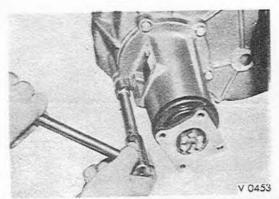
Removing the front drive extension housing from the transfer case.
